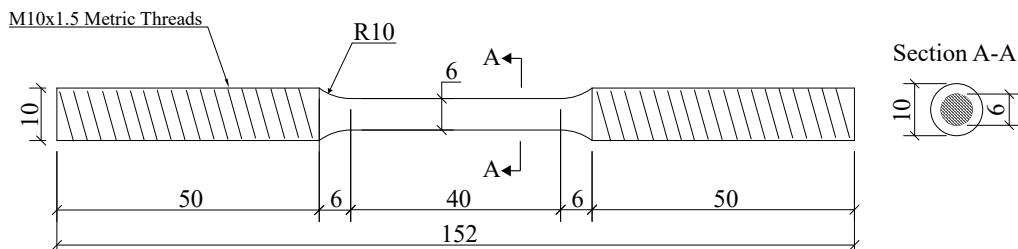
Technical drawing of the round steel coupons / GJSFB test campaign.
